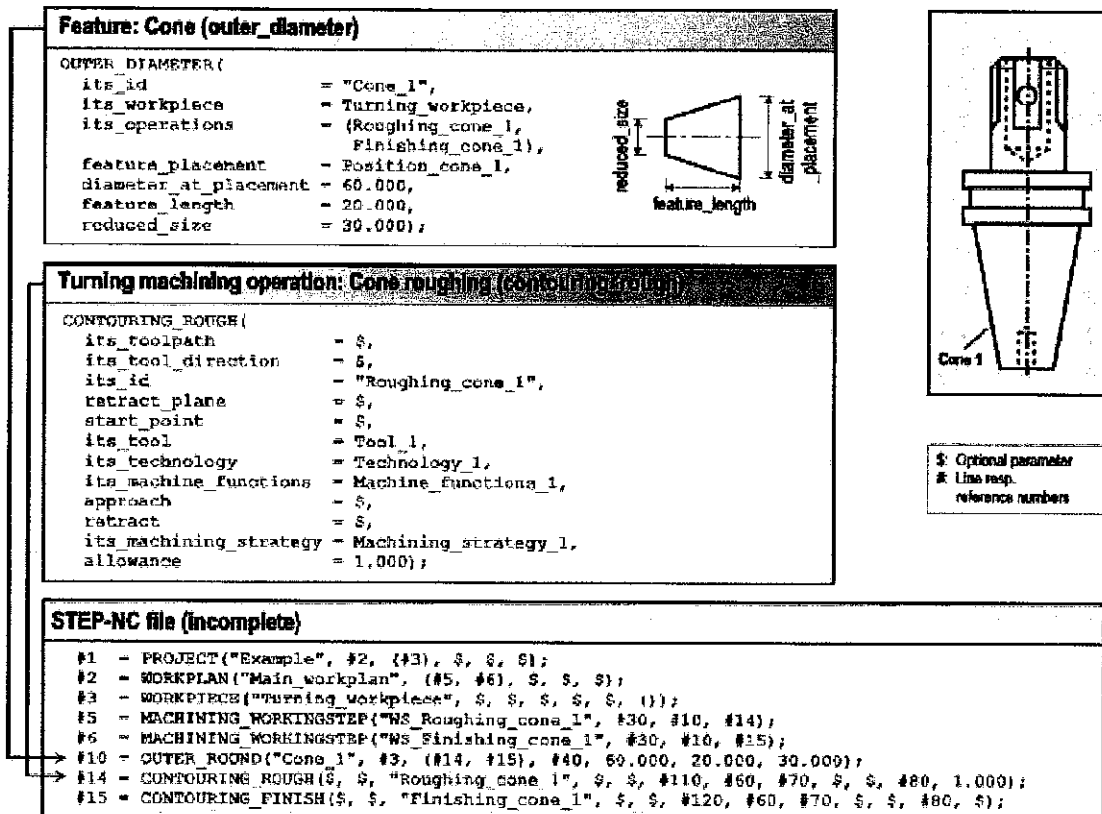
Workpiece and STEP-NC File Representation[60]
